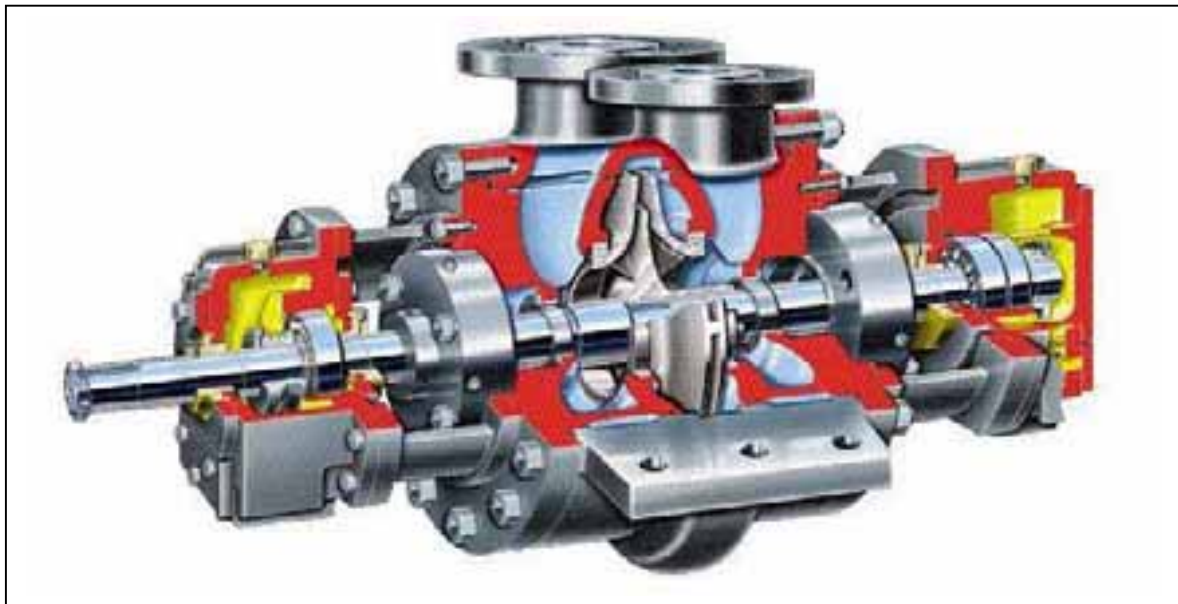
,7 – 3 Radial Split Casing Pump Cut-away Showing Double Entry Impeller
